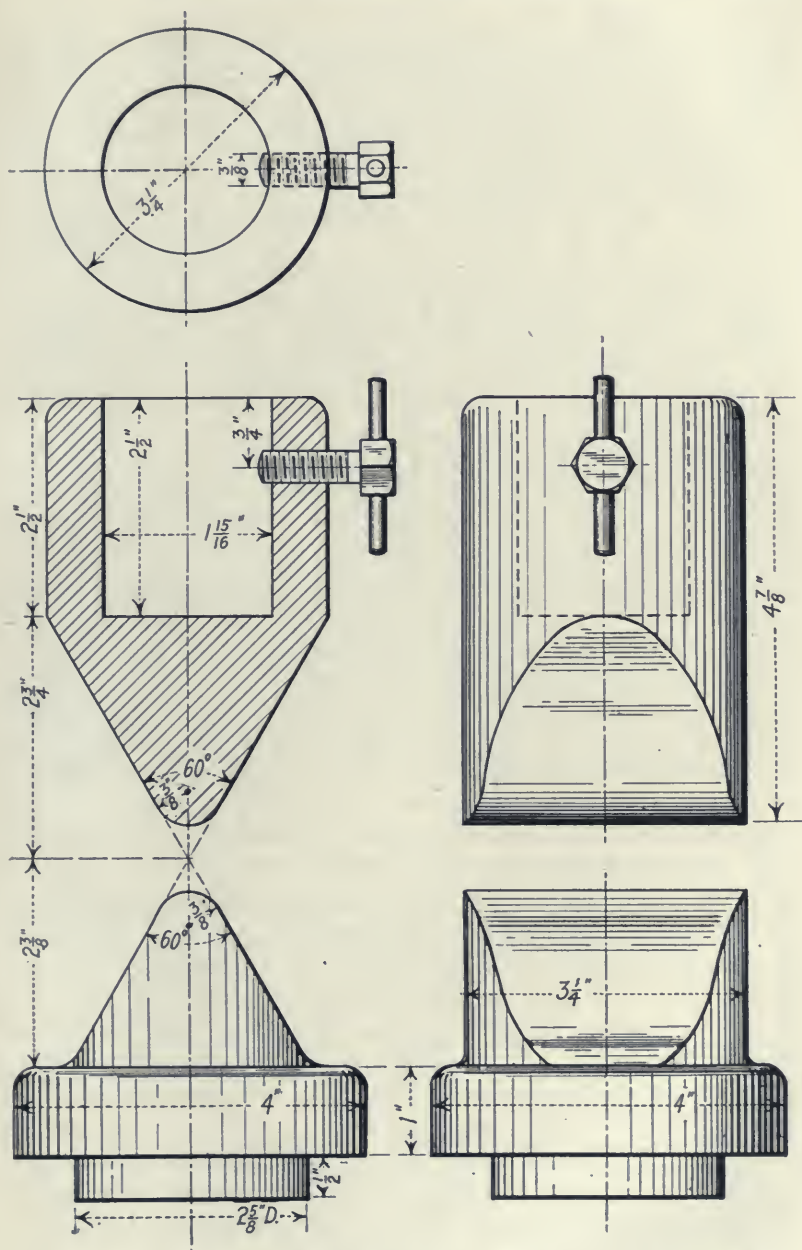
Knife Edges Used on Machine for Preparation of Samples for Abrasion Test.
